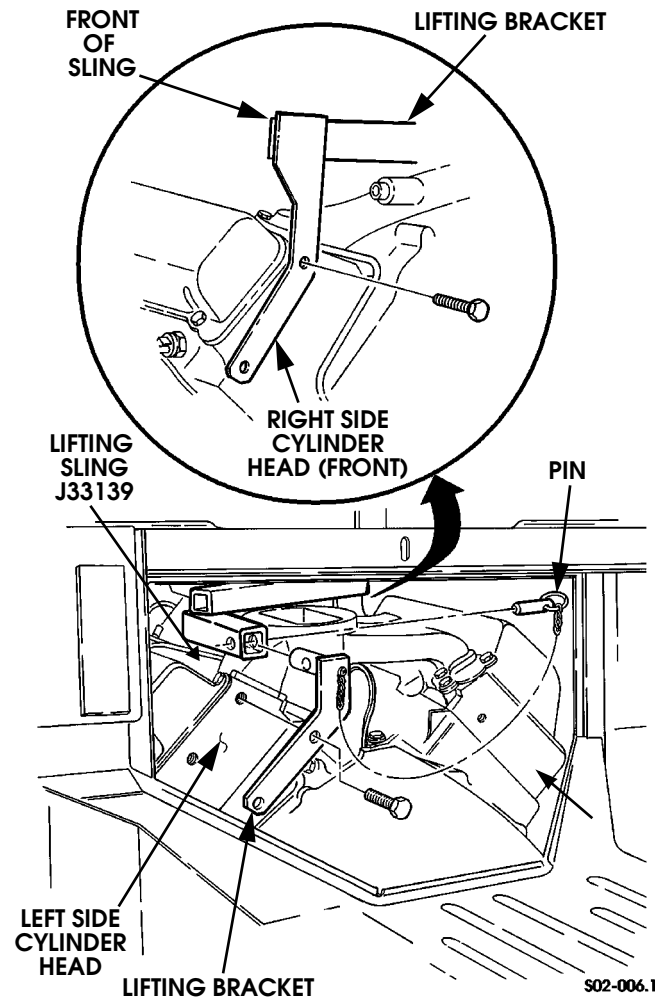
Lifting Bracket to Cylinder Head Attachment
